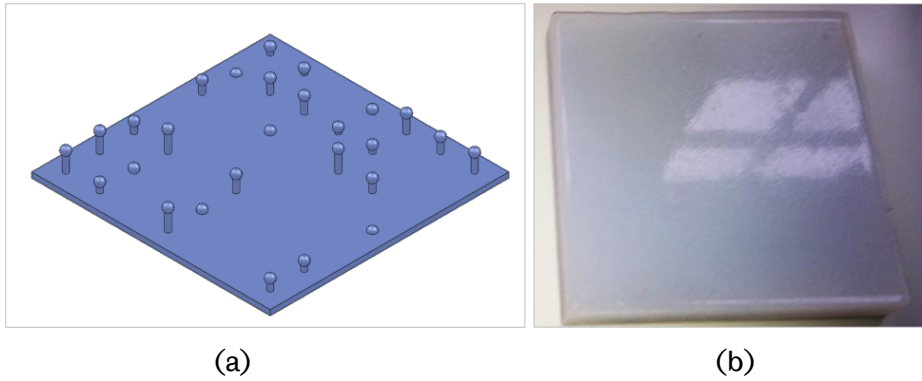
SMETT 'P&P' Mk III prototype (a) CAD model and (b) after moulding
